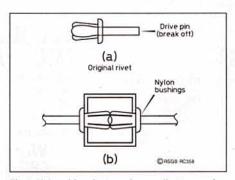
Nylon drive rivets make excellent mounting bushes for 4mm rod elements.
